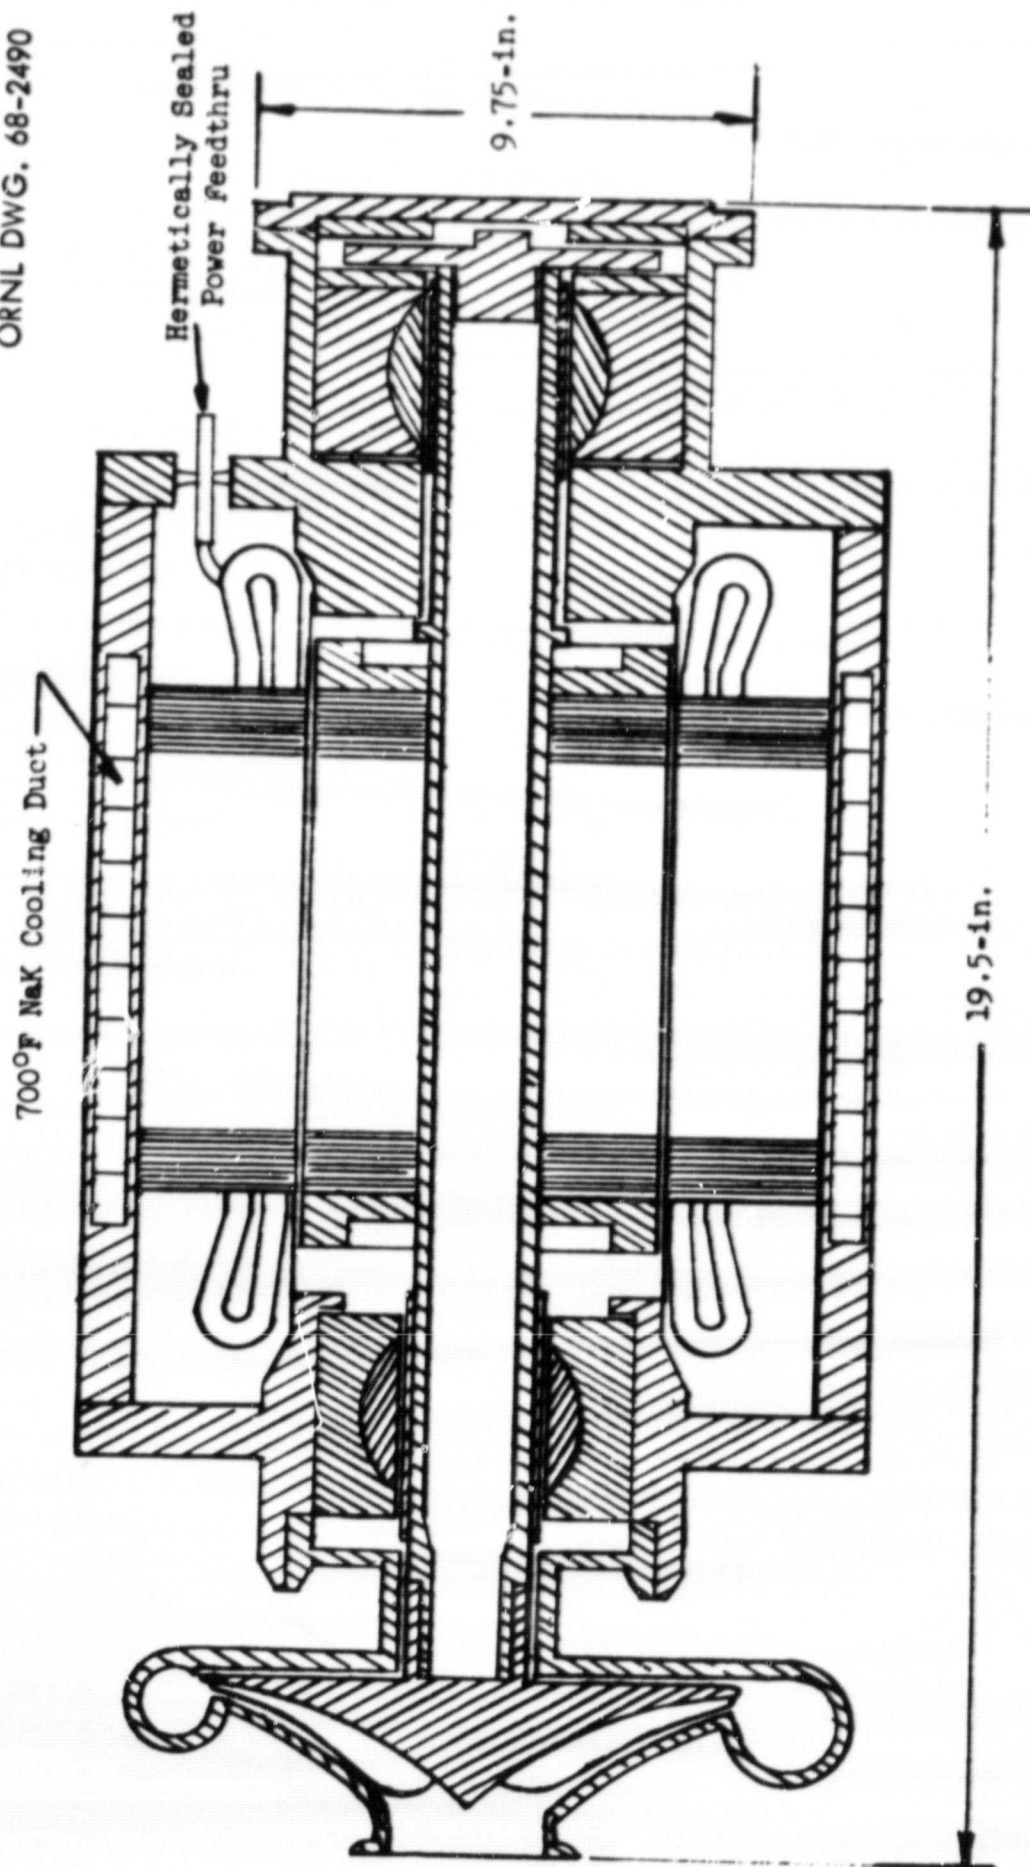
Cross Section of the Preliminary Design of the Canned Rotor Pump for Cesium Boiler Feed Application. Pump weight 274 lb.
